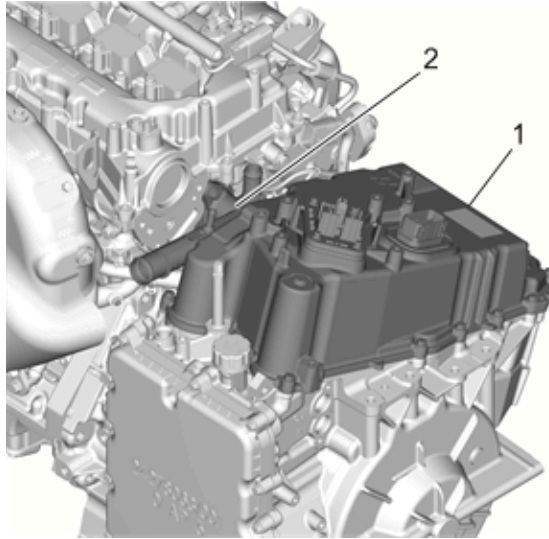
Drive Motor Power Inverter Module Cover And Water Outlet
